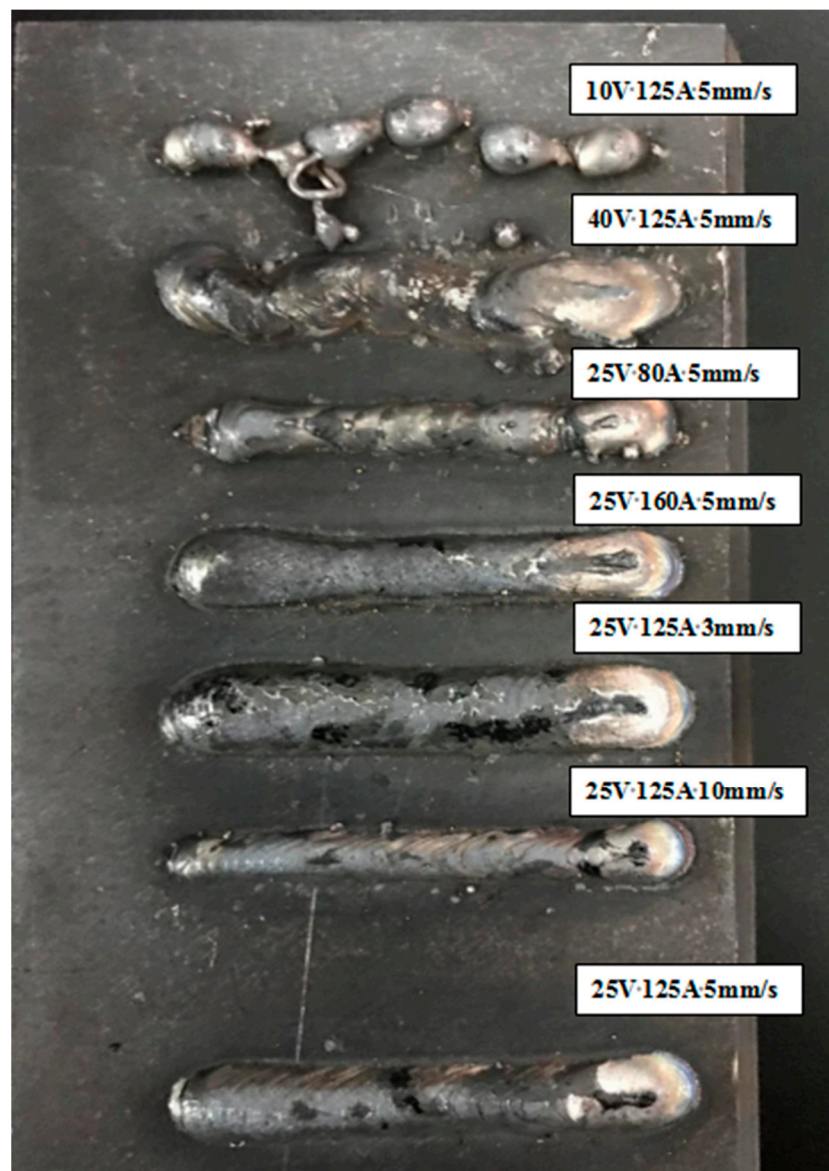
Single-layer single-pass weld shapes with various process parameters.
